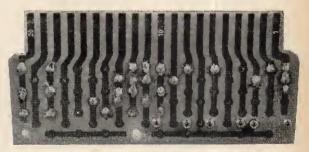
Underside view of the printed wiring board showing the breaks in the copper strips and additional holes to be drilled. The reference numbers on the strips opply to those in Figs. 1 to 5 inclusive
